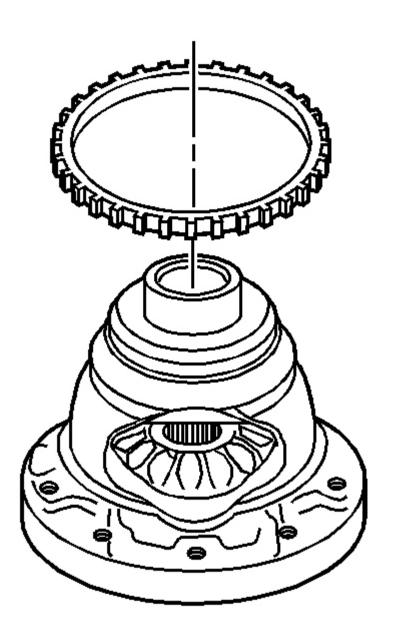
View Of VSS Ring Courtesy of GENERAL MOTORS CORP.
